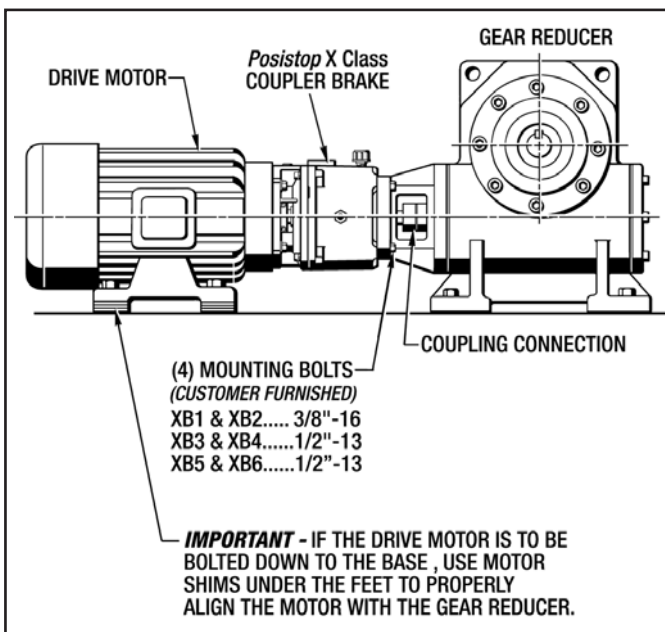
Drive Motor & Gear Reducer Alignment
